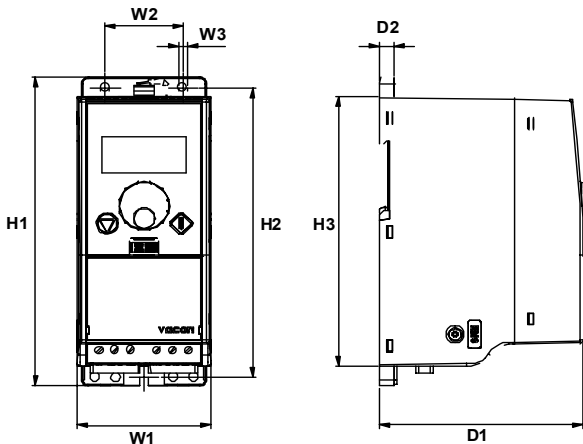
Vacon 10 dimensions, MI1-MI3
